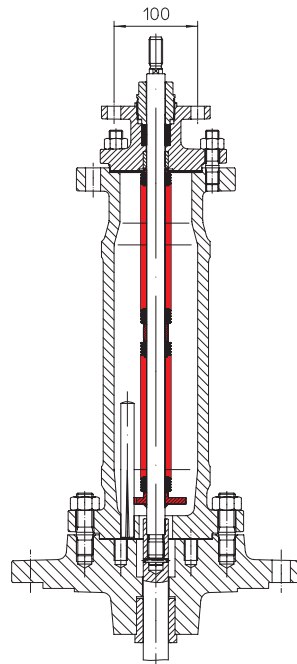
, nominal diameter DN250, nominal pressure PN40, body material 1.0619+N, mixing plug, Kvs 400, steam sealing graphite-packing, with pneumatic actuator DP34.
